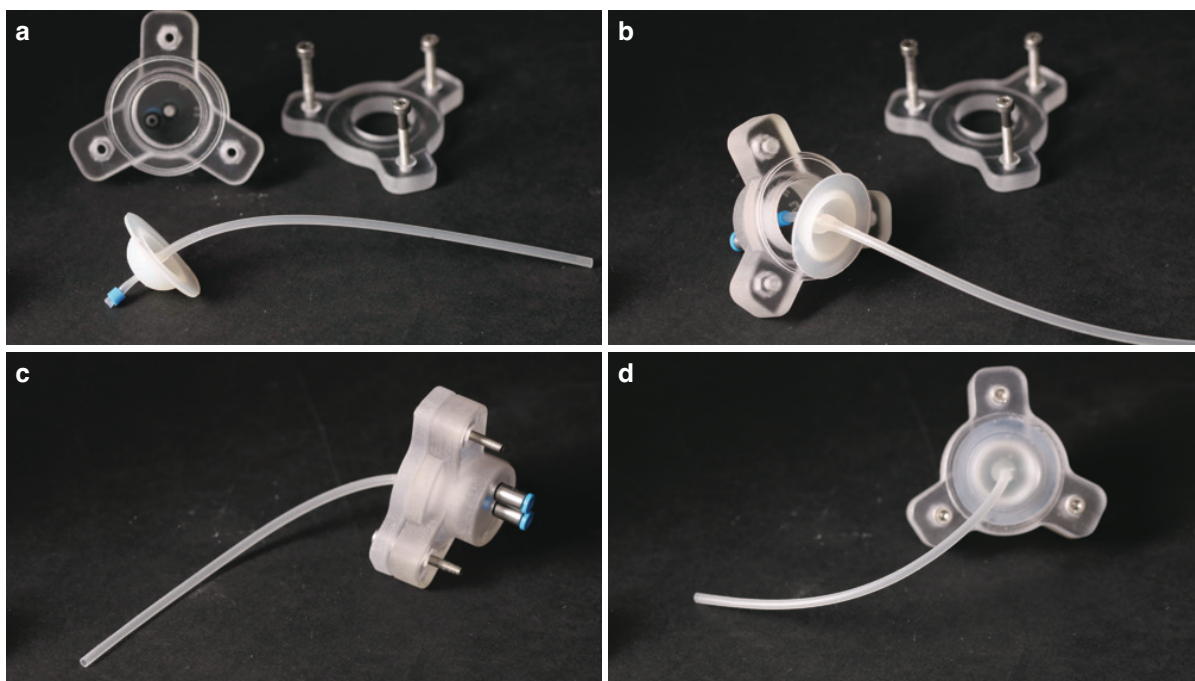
Assembly of the pressure-release valve. Starting from the component in Figure S14d, we assemble it using 3D printed holders with parameters as specified in Figure S13. (a) We place 2mm of FESTO® 4 tube on the end of the silicone tube connected to the bottom holder to guarantee a firm connection between the two. (b) We then slide the silicone tube on the bottom holder. (c-d) Inlet and outlet view of the assembled pressure-release valve.
